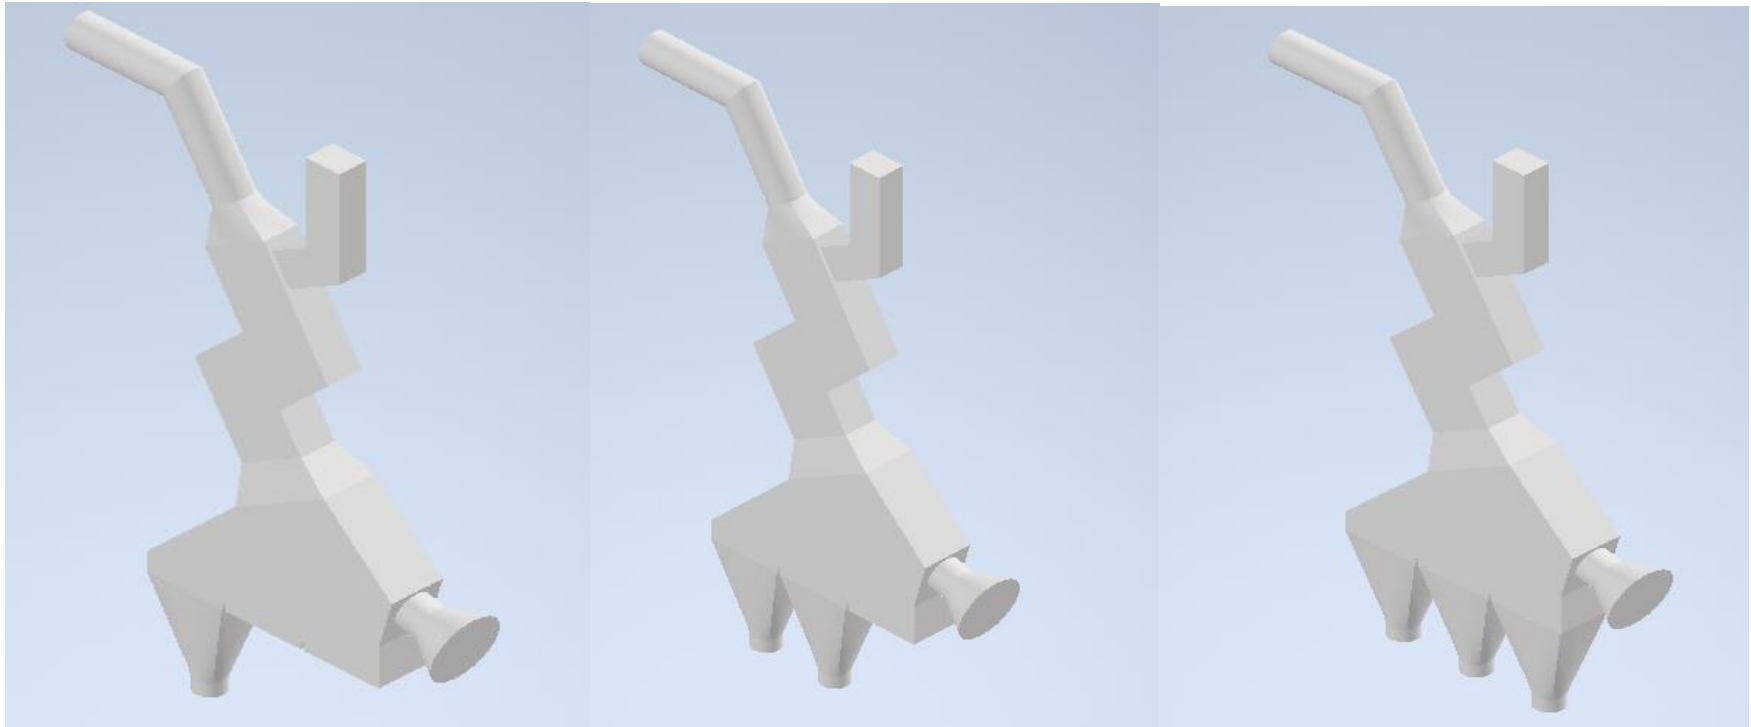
Using the joint tool to connect the chute to the upper section of chamber 1
